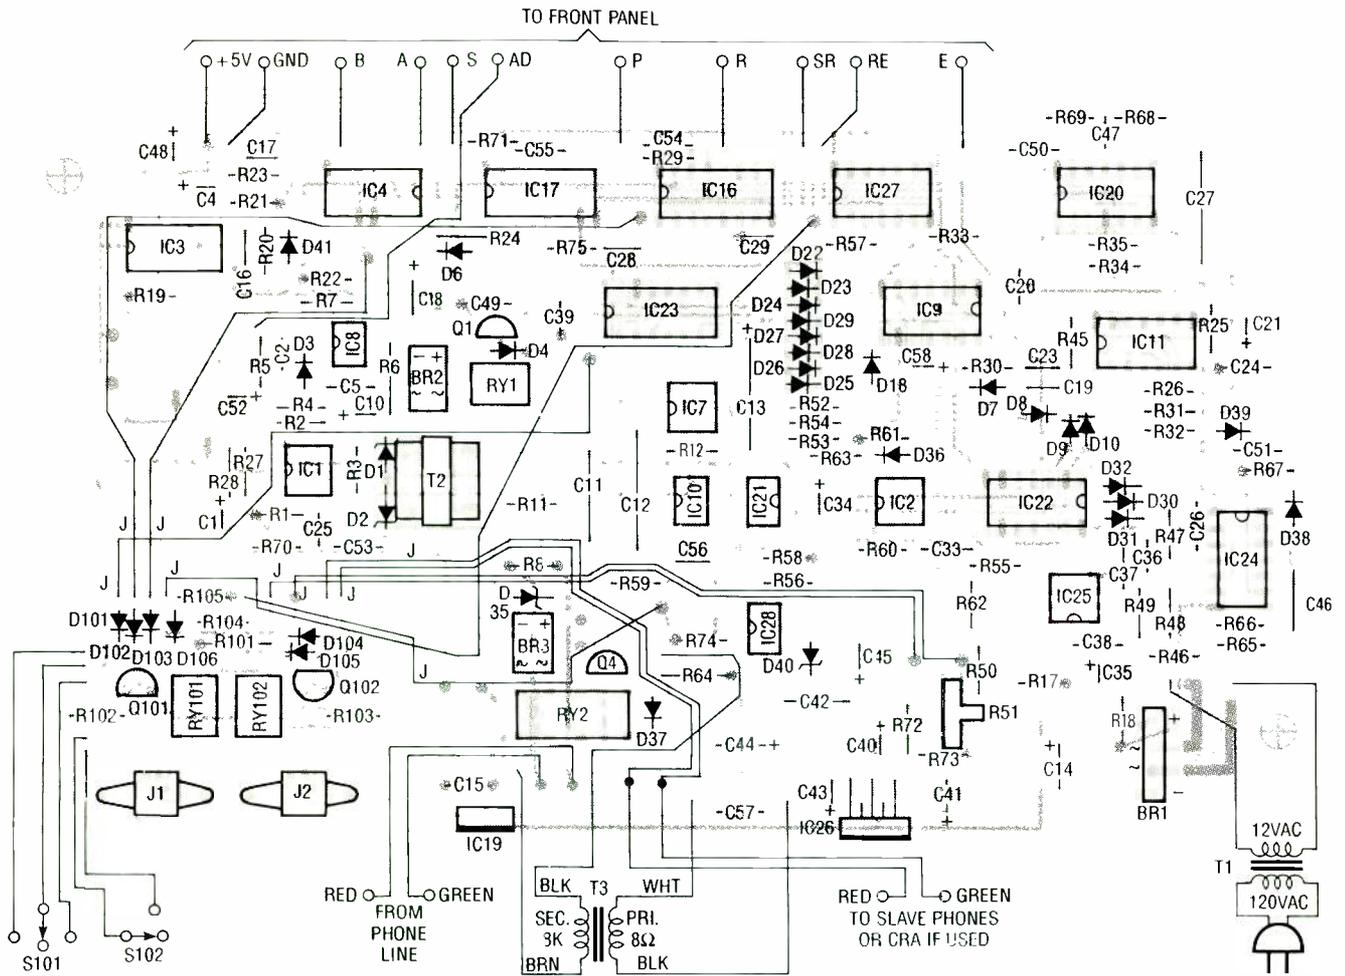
PARTS-PLACEMENT DIAGRAM for the main board. Note that the CRA parts also mount on this board, although the two circuits are completely separate.
